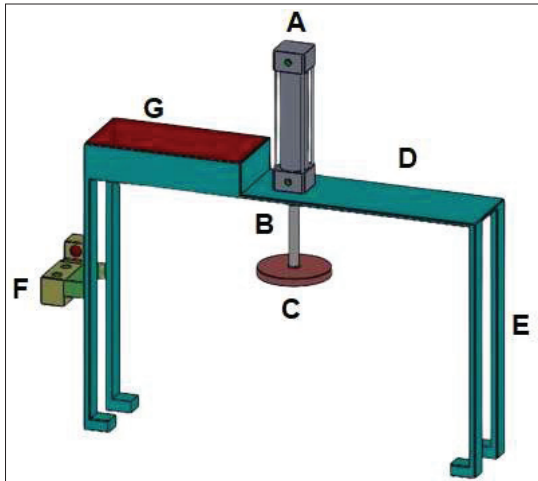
Isometric view of the mechanical setup (A- Pneumatic cylinder, B- Piston rod, C- Compression pad, D- Metallic frame, E- Rods, F- Solenoid valve, G- Electronic hardware setup)
